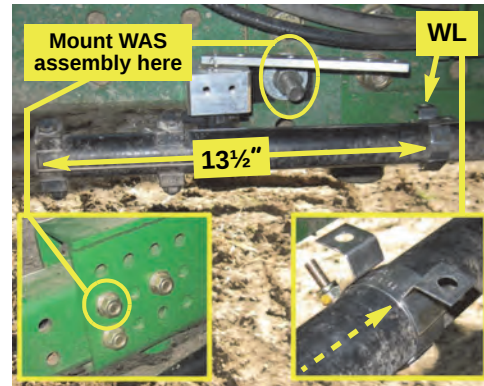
with insets: WAS assembly and link rod clamp bracket installed
